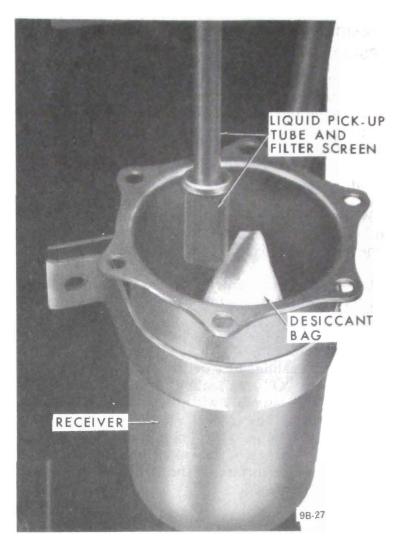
B-31 Receiver Shell Removed for Access to Desiccant Bag
